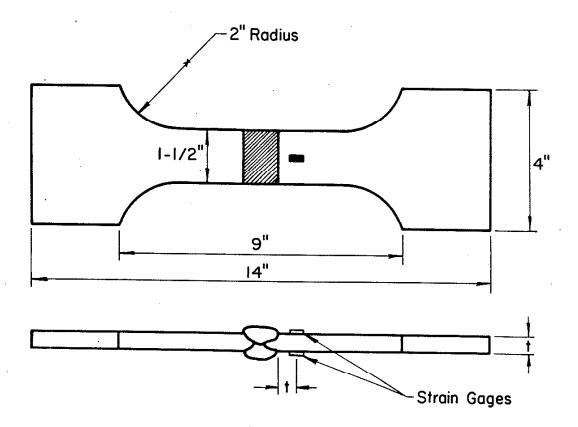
A-36 Steel Butt Weld Fatigue Test Pieces
